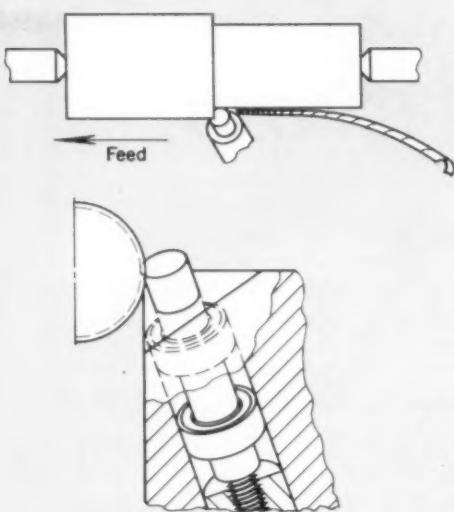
Rotating tool used for turning. By rotating the tool, overheating of the cutting edge is avoided. The tool proved unsatisfactory because vibration caused chipping of the carbide insert.
